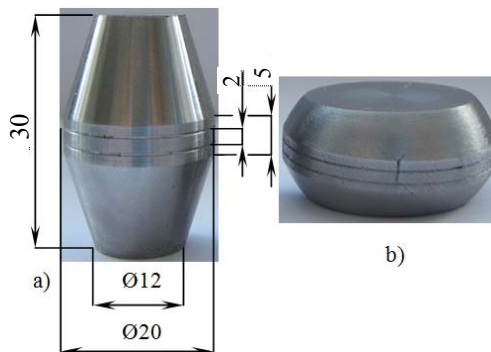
Upsetting of tapered specimen: a) initial specimen, b) specimen after forming [2, 8]
